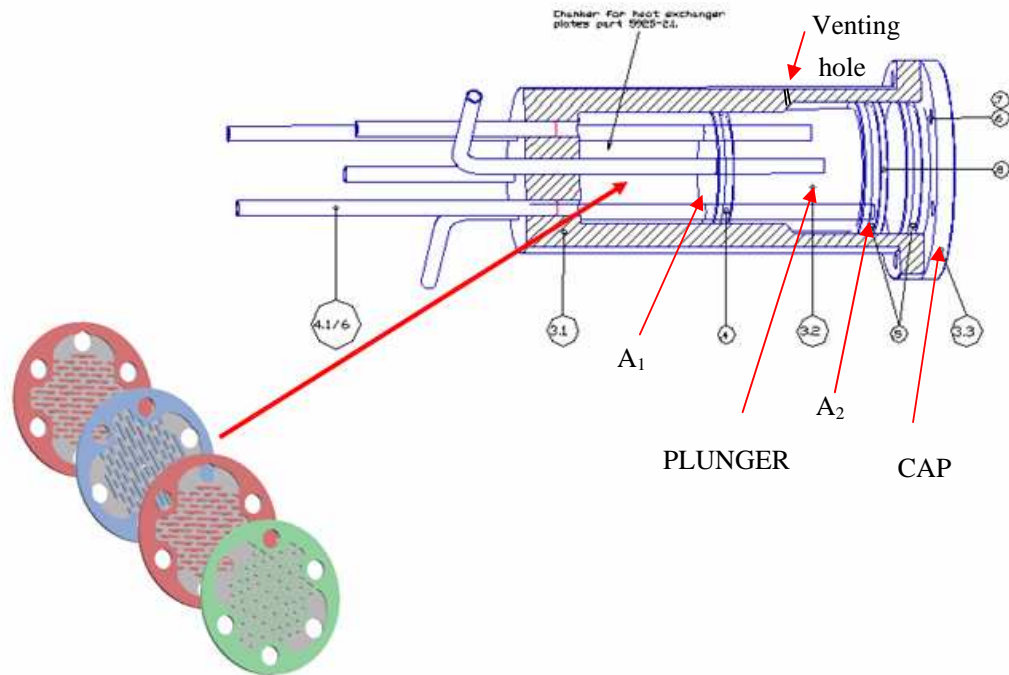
Bread Board Model Heat eXchanger 3-D view,
